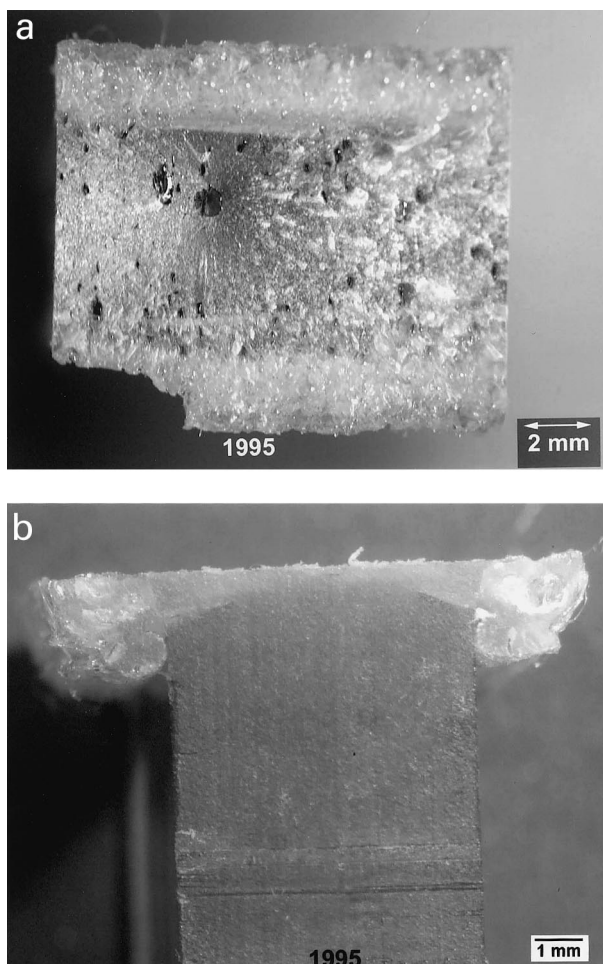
Fracture surfaces of 6.2-mm-thick PEI specimens for hot-tool weld made at  $T_H = 380^\circ\text{C}$ , a heating time of 20 s, melt and weld penetrations of 0.13 and 0.91 mm, respectively, and a seal time of 10 s. (a) Top view, and (b) side view.
